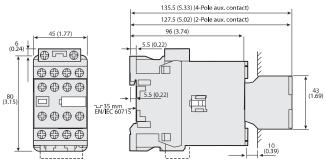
100-E26...100-E38 4-Pole Contactors with Standard Coils and Front-mounted Auxiliary Contact
